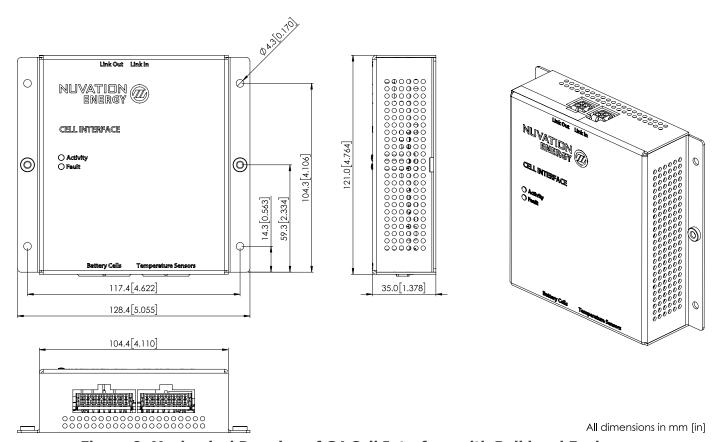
Mechanical Drawing of G4 Cell Interface with Bulkhead Enclosure
